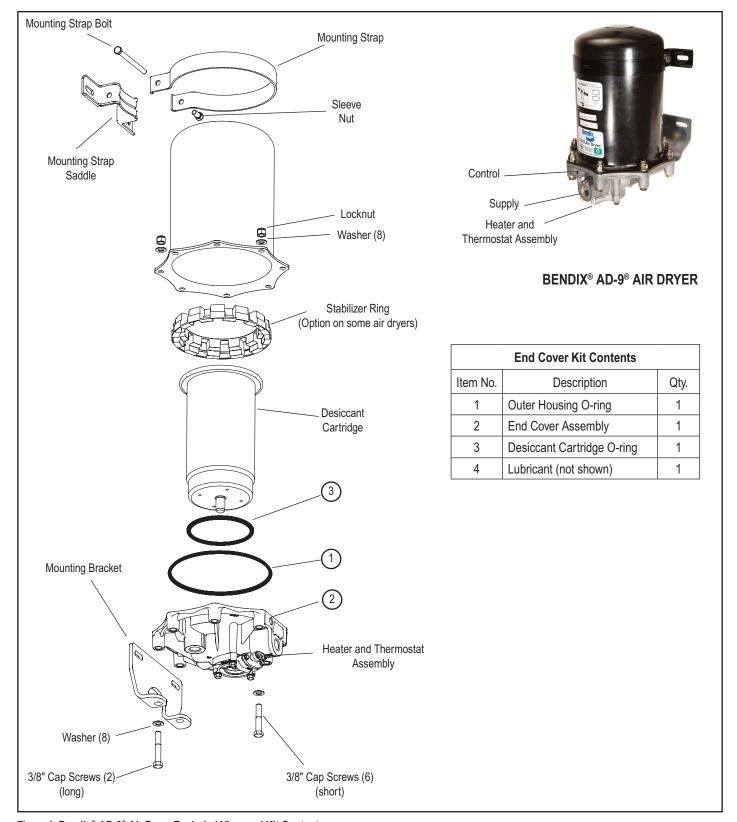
Bendix® AD-9® Air Dryer Exploded View and Kit Contents
